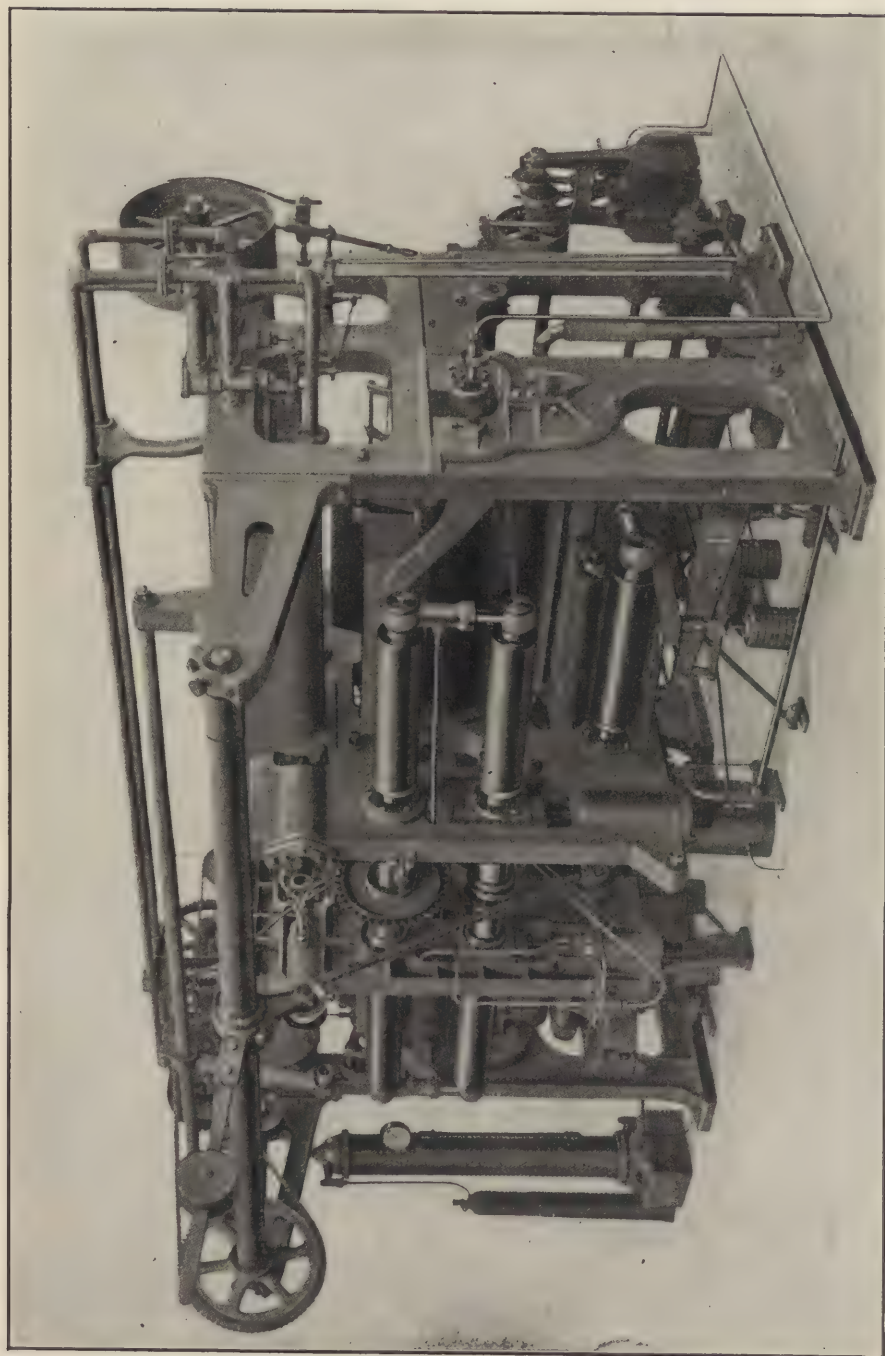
Automatic Skein Mercerising Machine, Revolving Type. (Haubold.)
